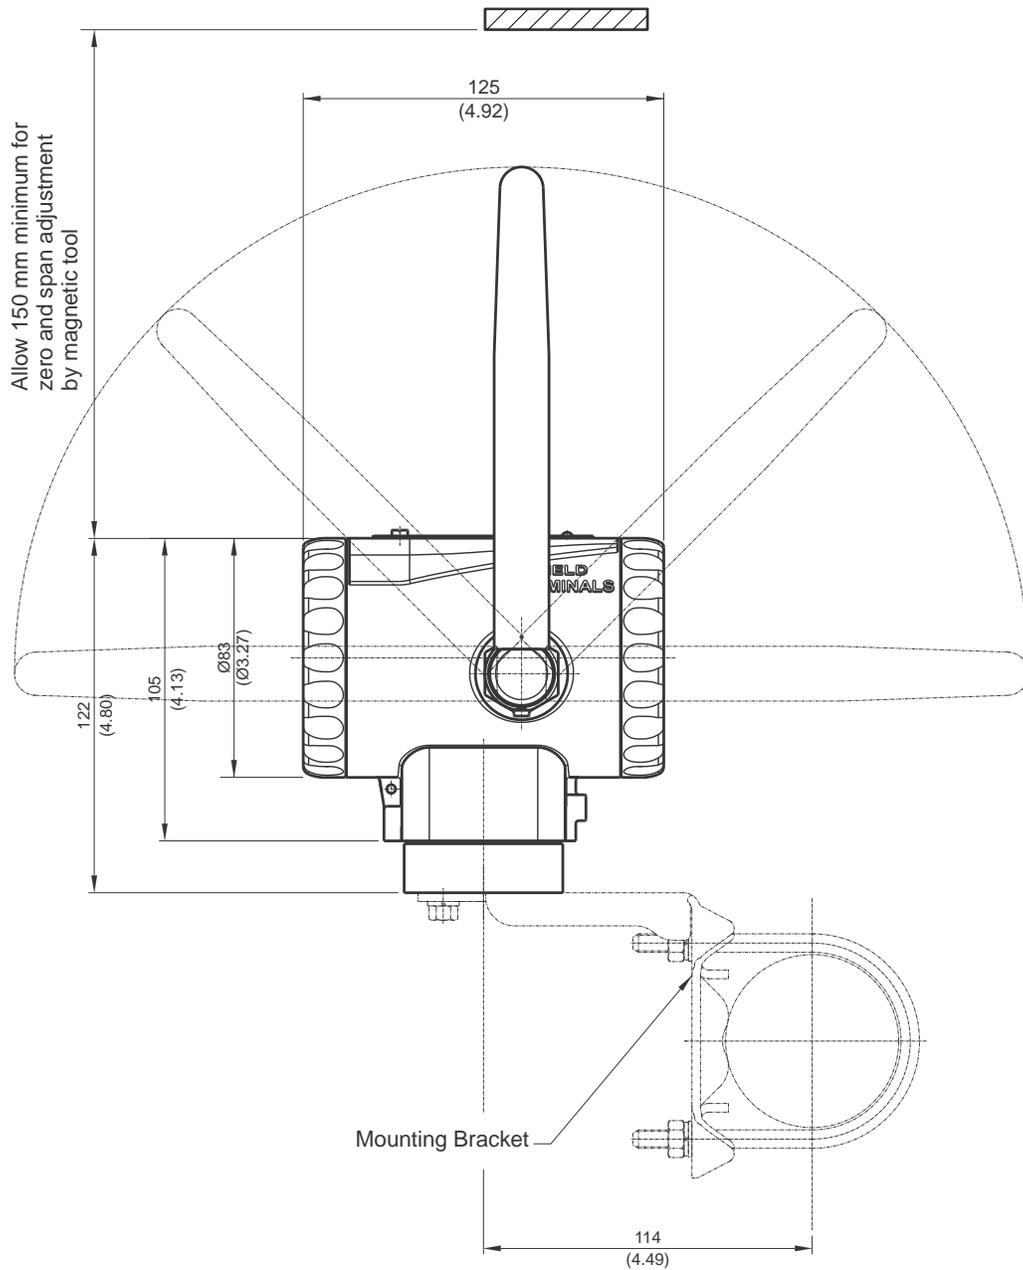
1 – Dimensional Drawing of RP400 WirelessHART® mounting in vertical
